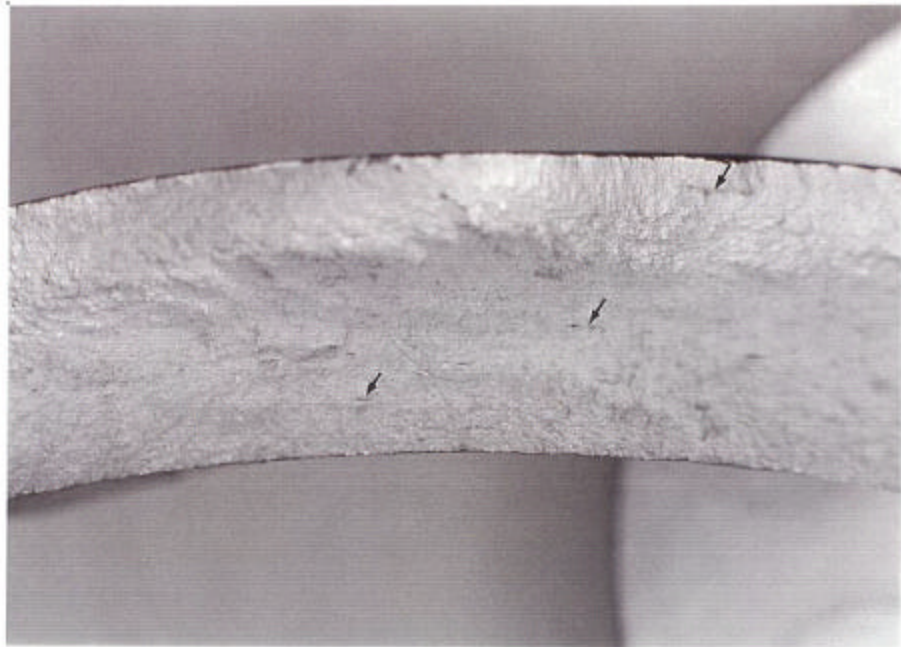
Enlarged photographs of the fracture surface show a large population of dark streaks.
